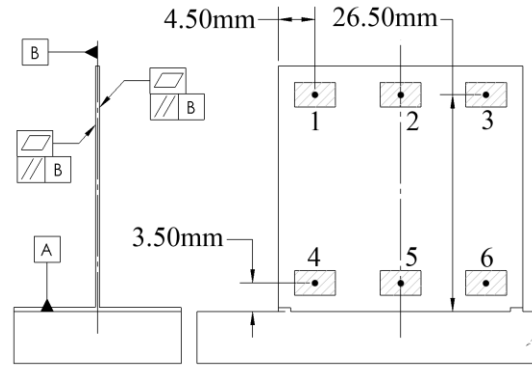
Drawing showing CMM patch scan locations 1 through 6 for measuring thickness, and datum locations for part orientation
